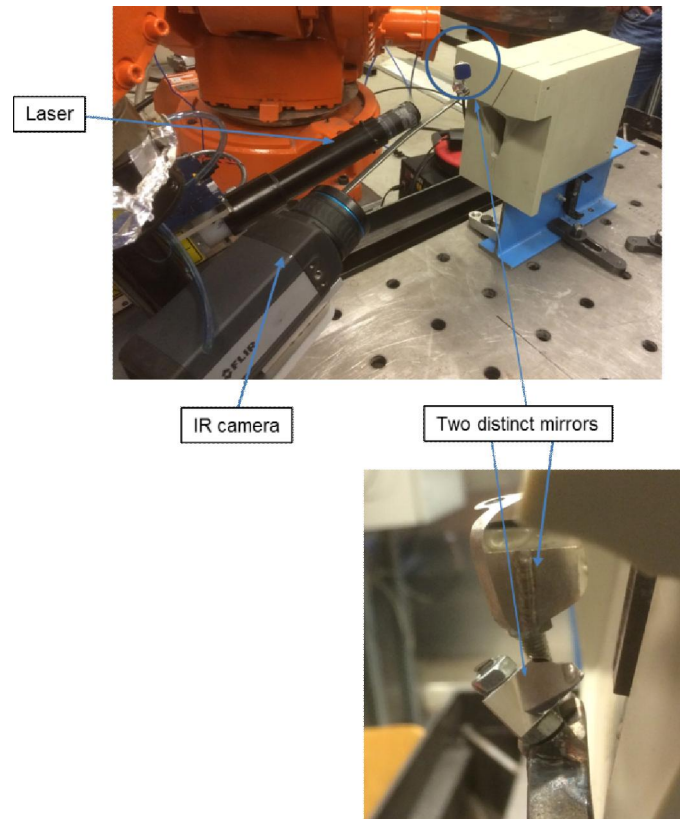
Second prototype of borescope solution mounted in the final NDT cell for weld inspection inside a mock-up of a guide vane with limited access.
